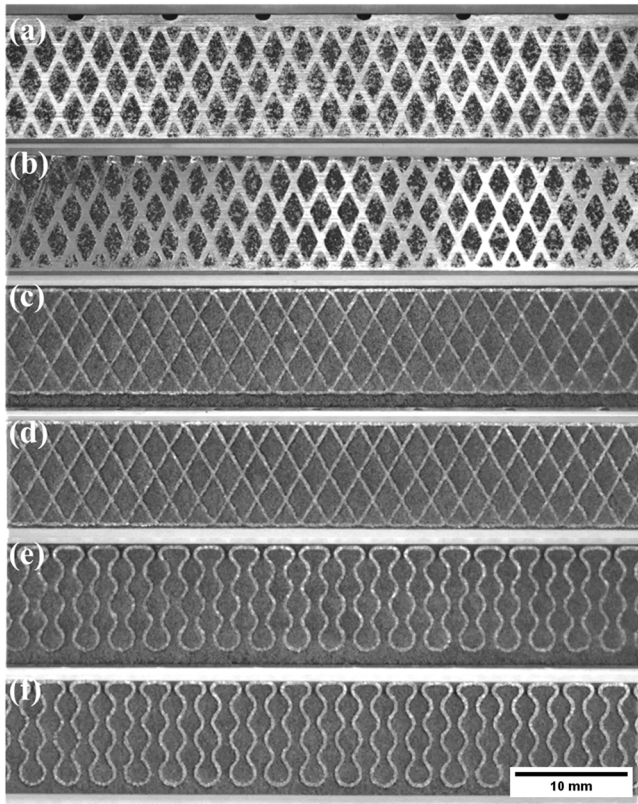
Plan-view of the composite specimen (abradable and underlying substrate with thickness between 0.25 and 0.45 mm); (a) Type A1 specimen, (b) Type A1 specimen with trimmed forward and rear walls, (c) Type B1 specimen, (d) Type B1 specimen with excess Ni-Al sinter ahead of the support structure removed, (e) Type C1 specimen, (f) Type C1 specimen with excess Ni-Al sinter ahead of the support structure removed.
